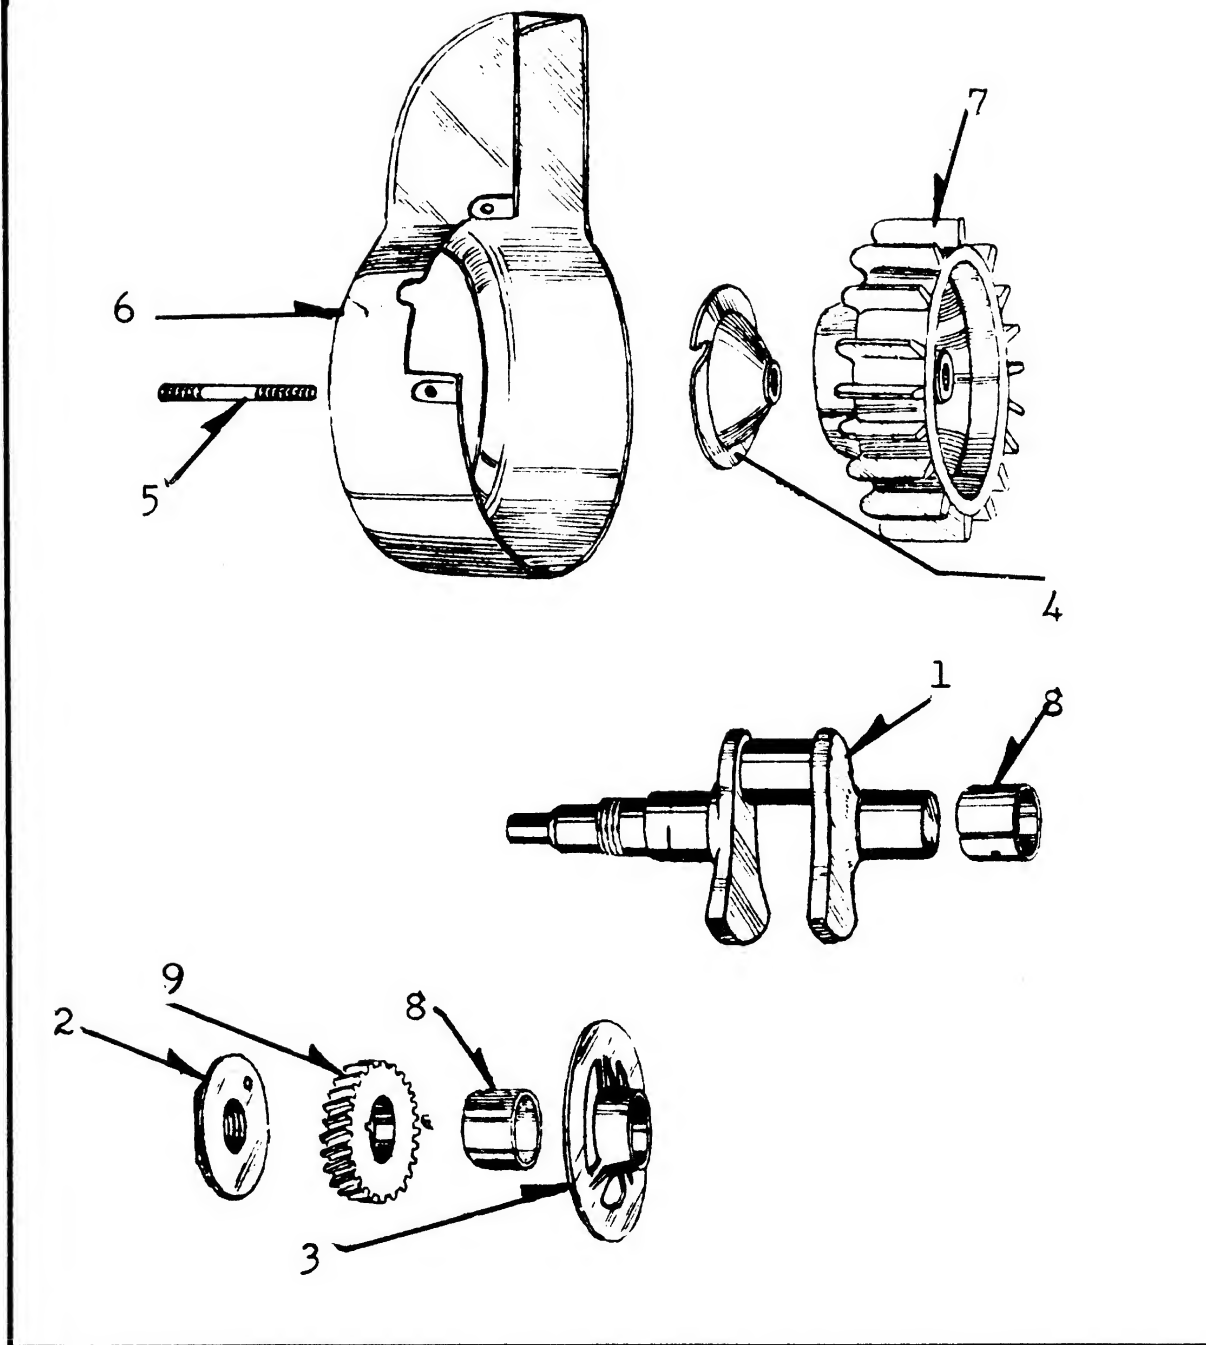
CRANKSHAFT AND FLYWHEEL GROUP
